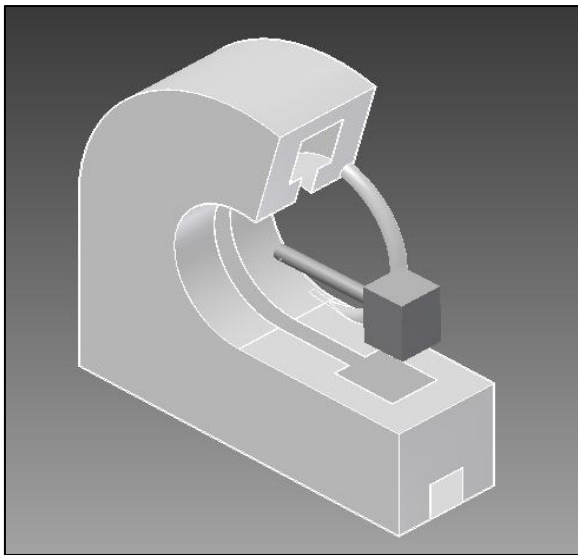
Modified Design of the Magnetic Refrigeration Setup
